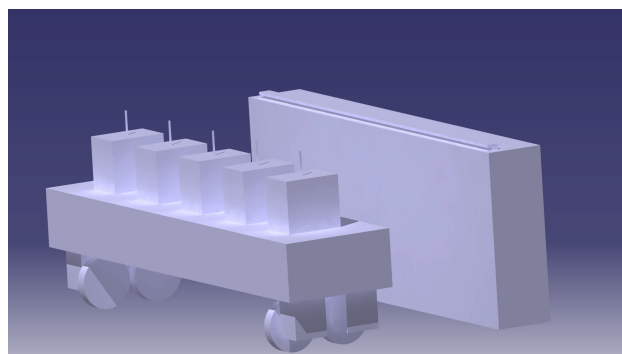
The cutting station used for the horizontal cuts of the braces
